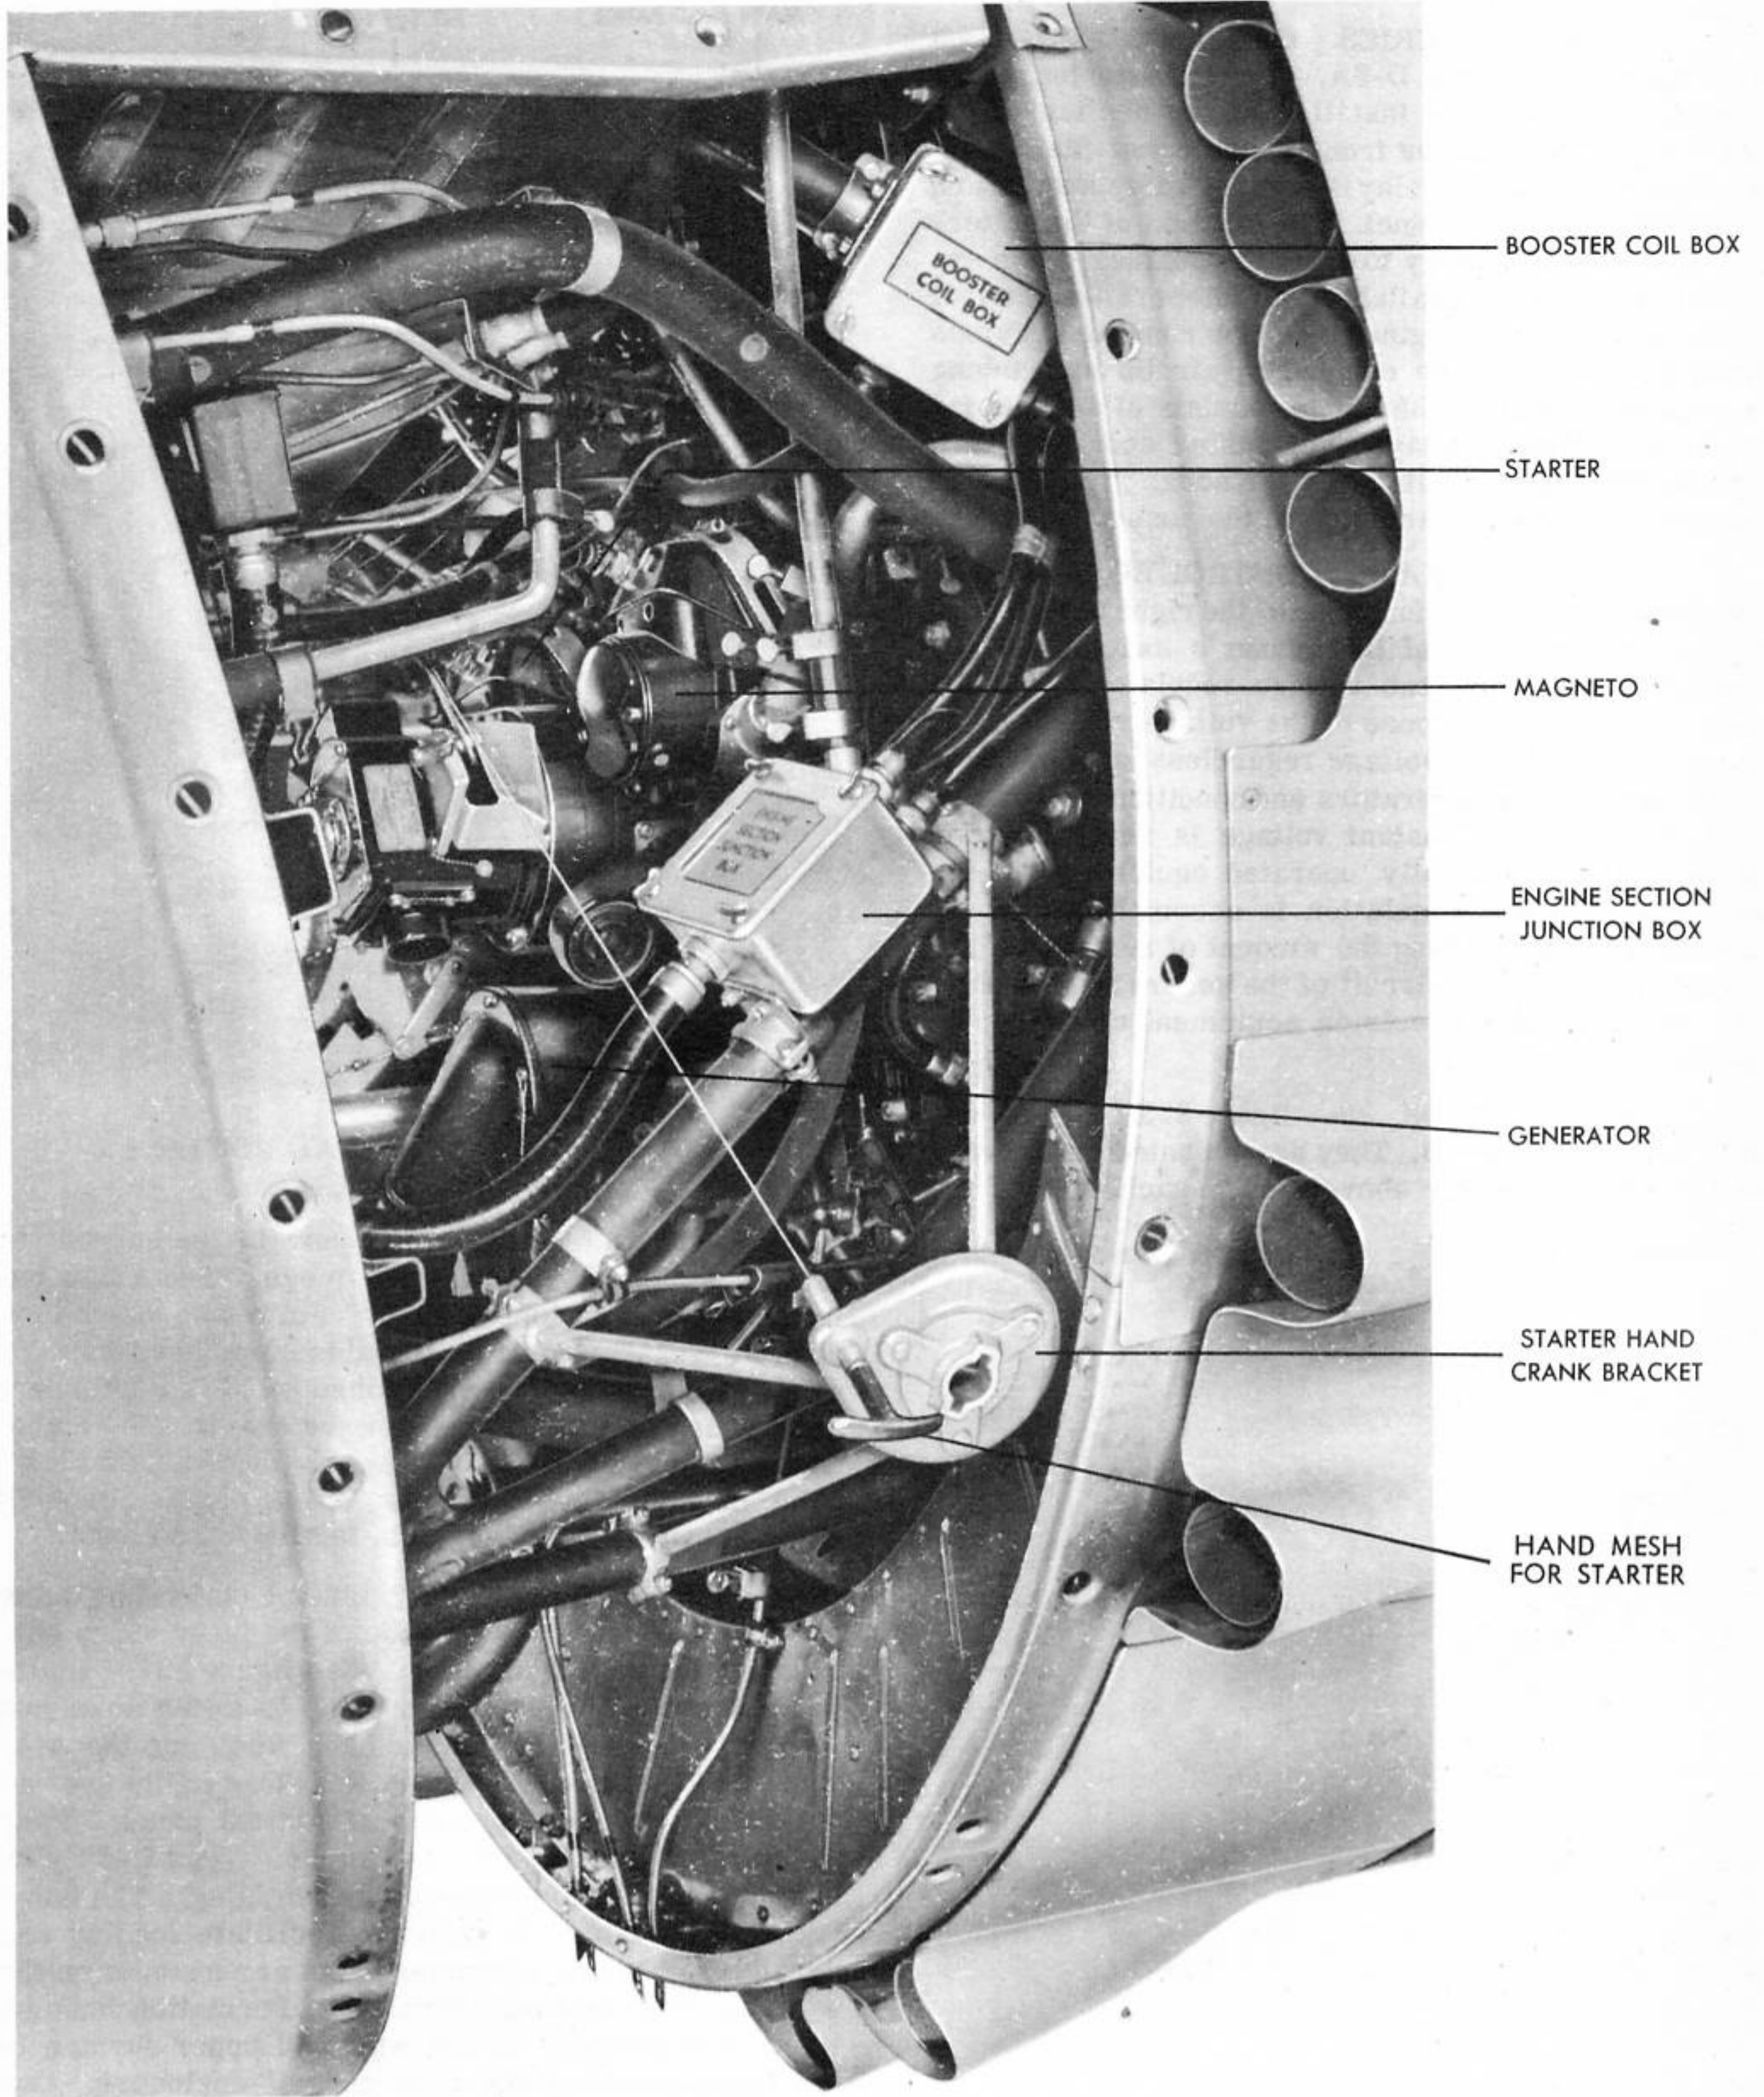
ELECTRICAL EQUIPMENT ON REAR OF INSTALLED ENGINE
